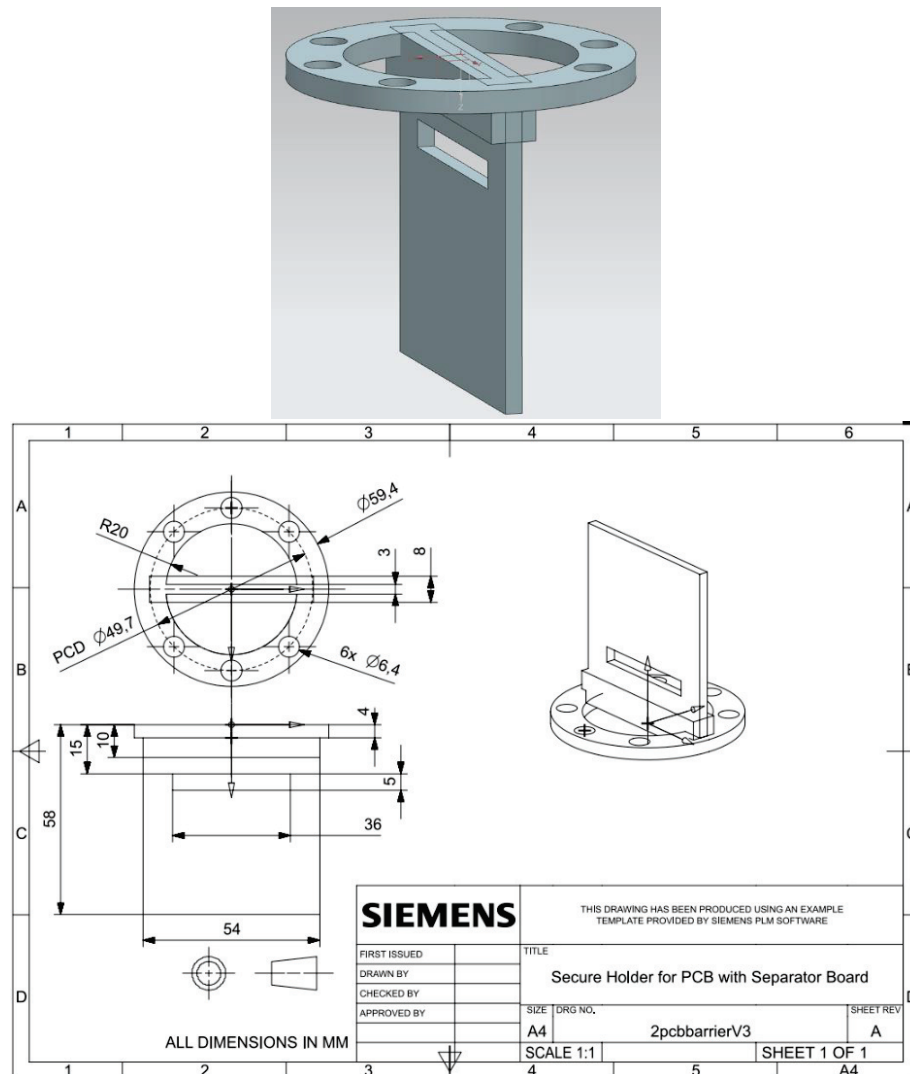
3D model and drawing of the secure holder for PCB with separator board
